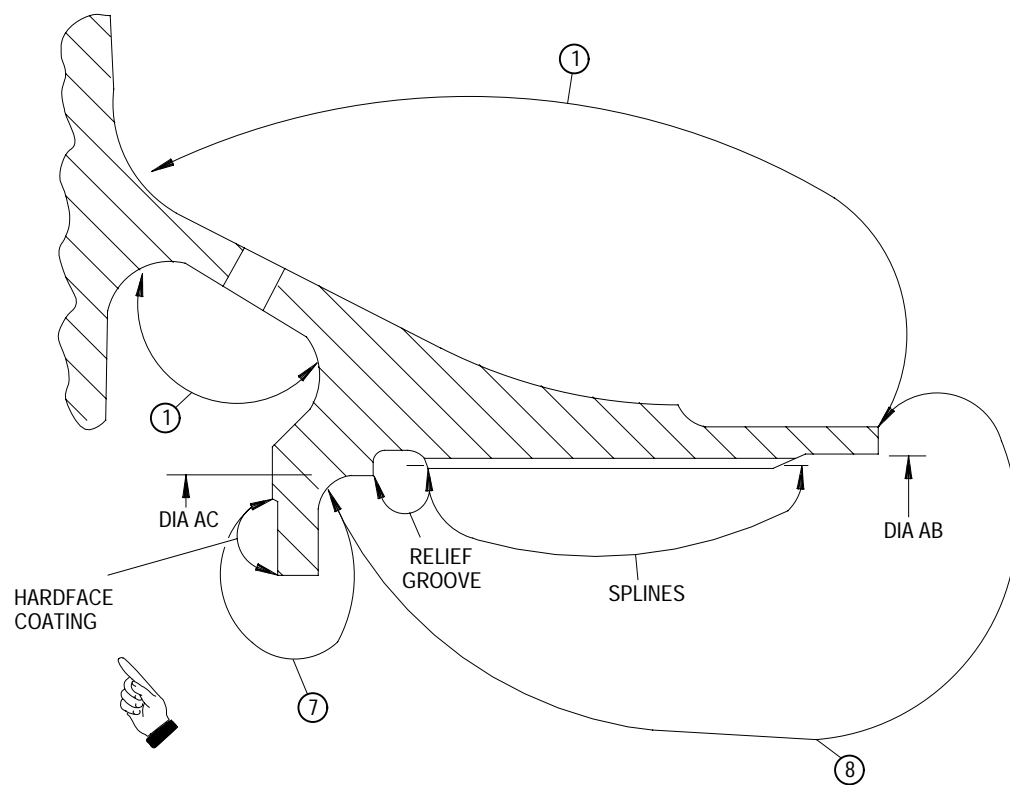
Front Compressor Drum Rotor Disk Assembly - Inspection (Sheet 3 of 5)
